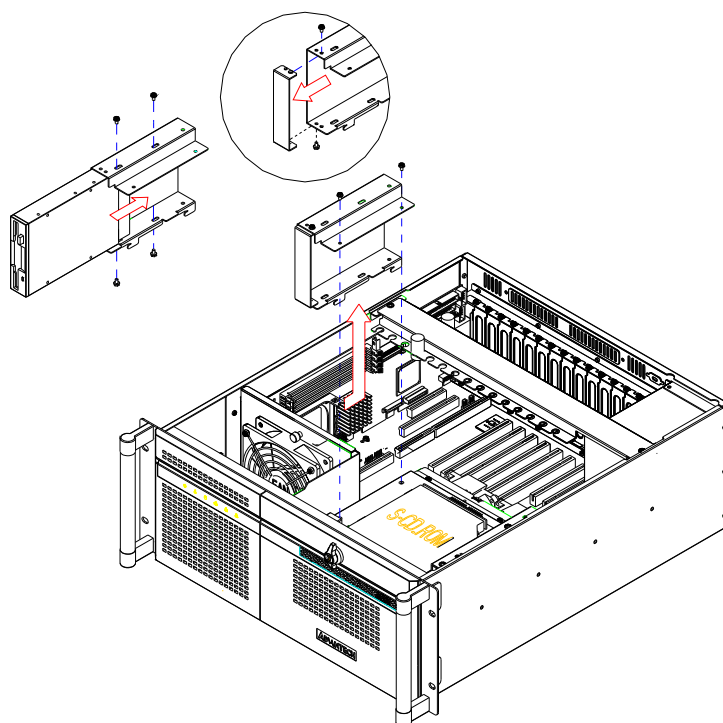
Installing disk drives/ 安装磁盘驱动器 / 安装磁碟機
